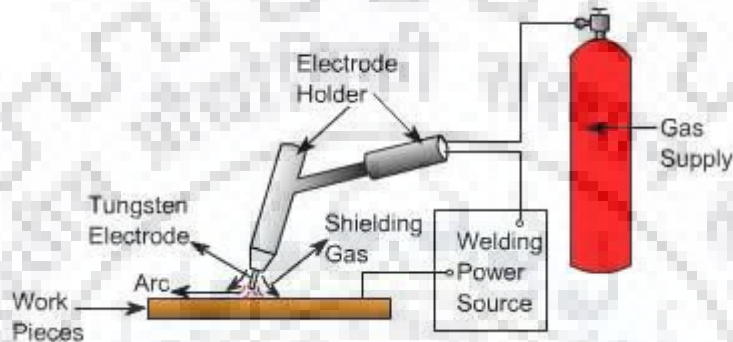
Schematic Diagram of TIG Welding System[4]
